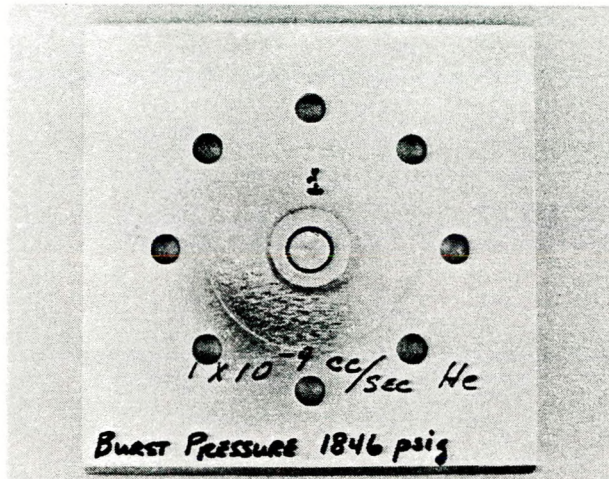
4047 to A356 Pressure Test Plate Welds
